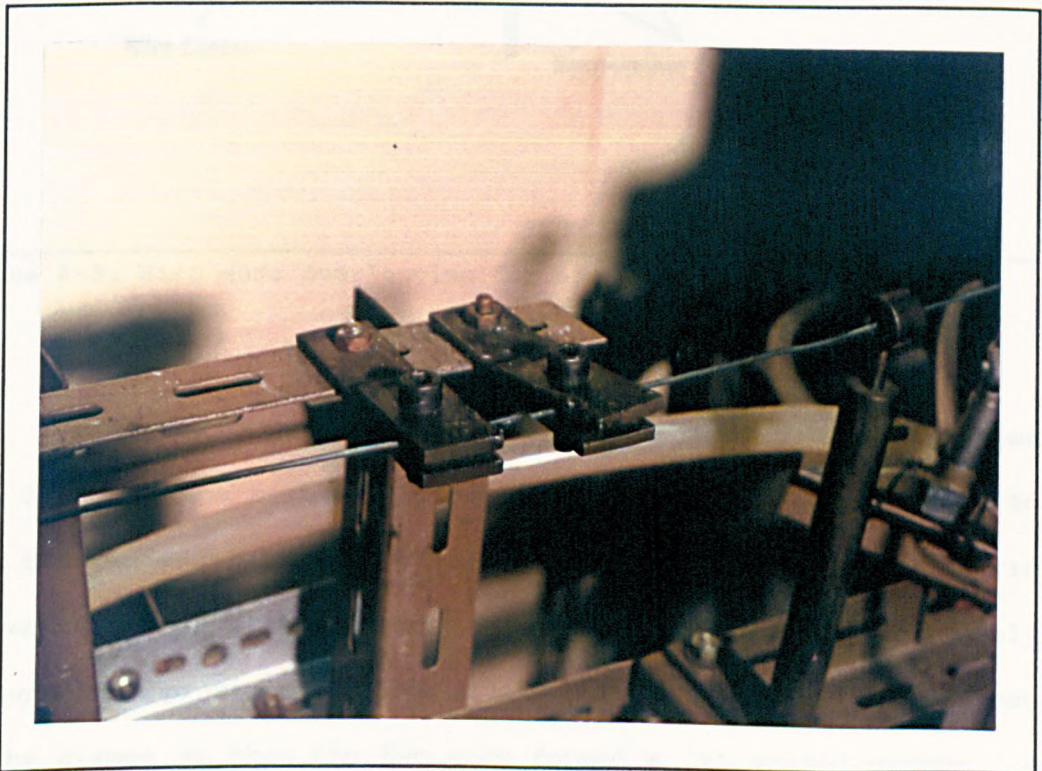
A photograph showing the ends of the wire in the clamps, ready for joining.
